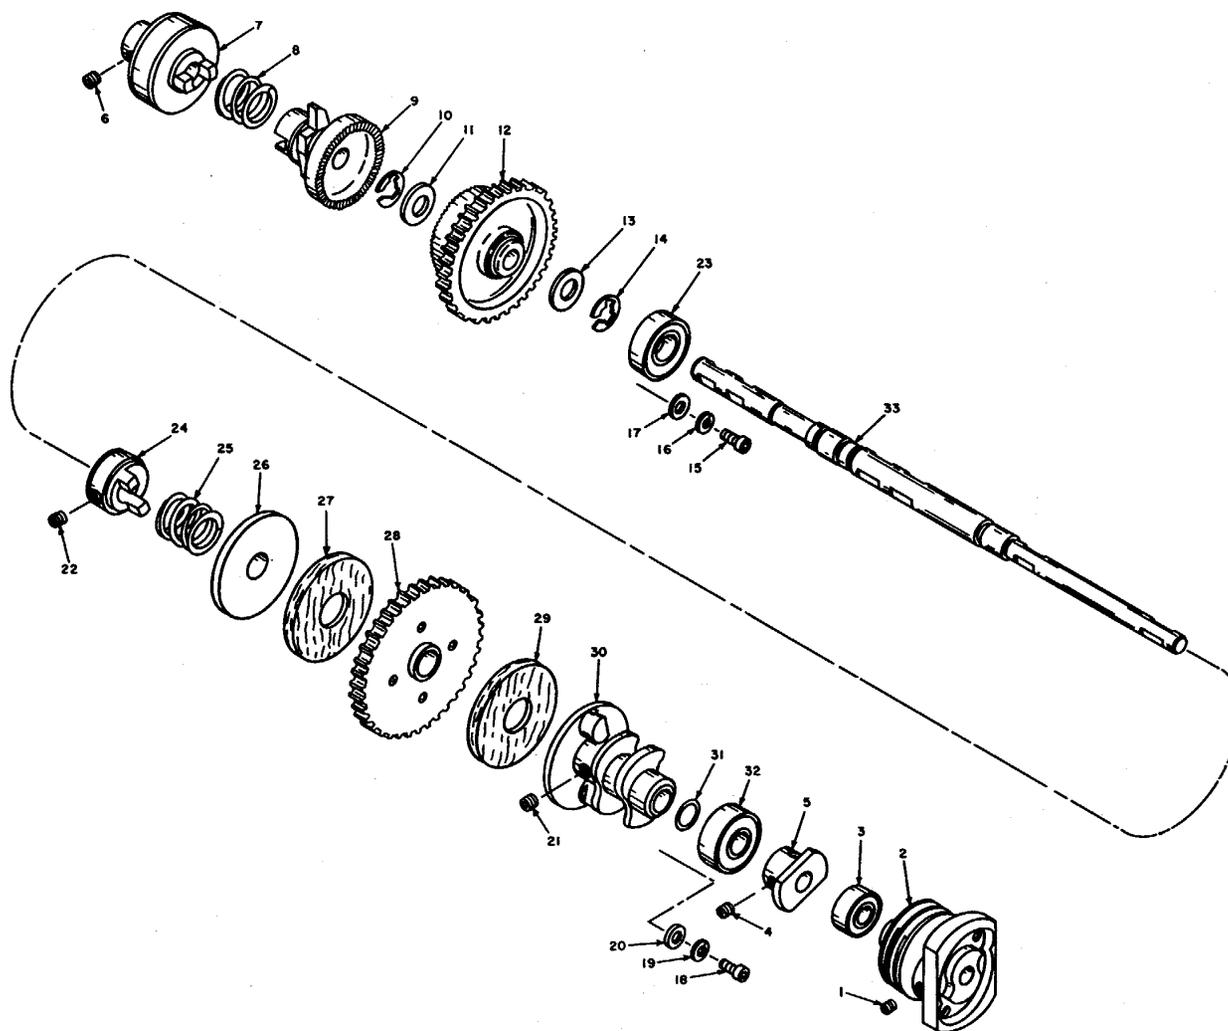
Function shaft, exploded view (TT-76/GGC).
